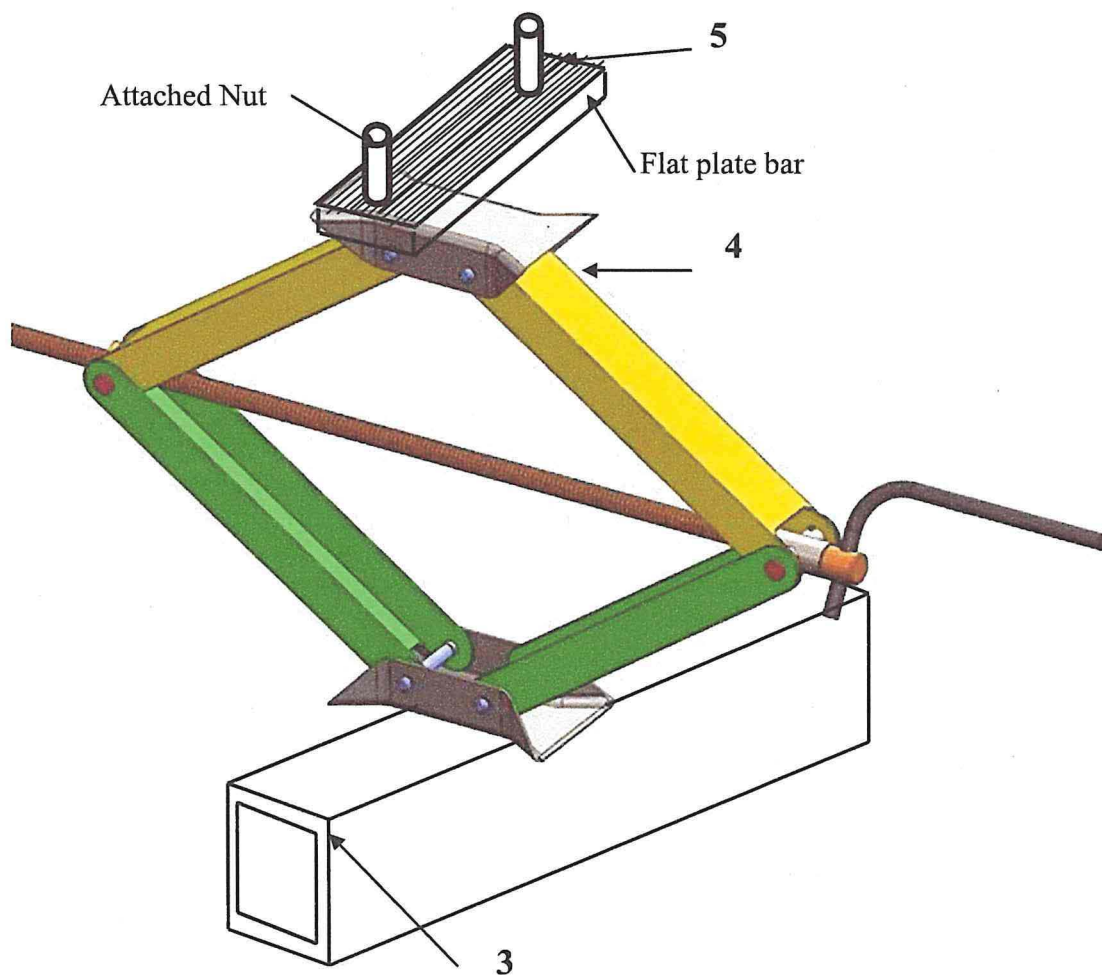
Design of the bolt and nut holding flat bar mounted on mechanical crew Jack
